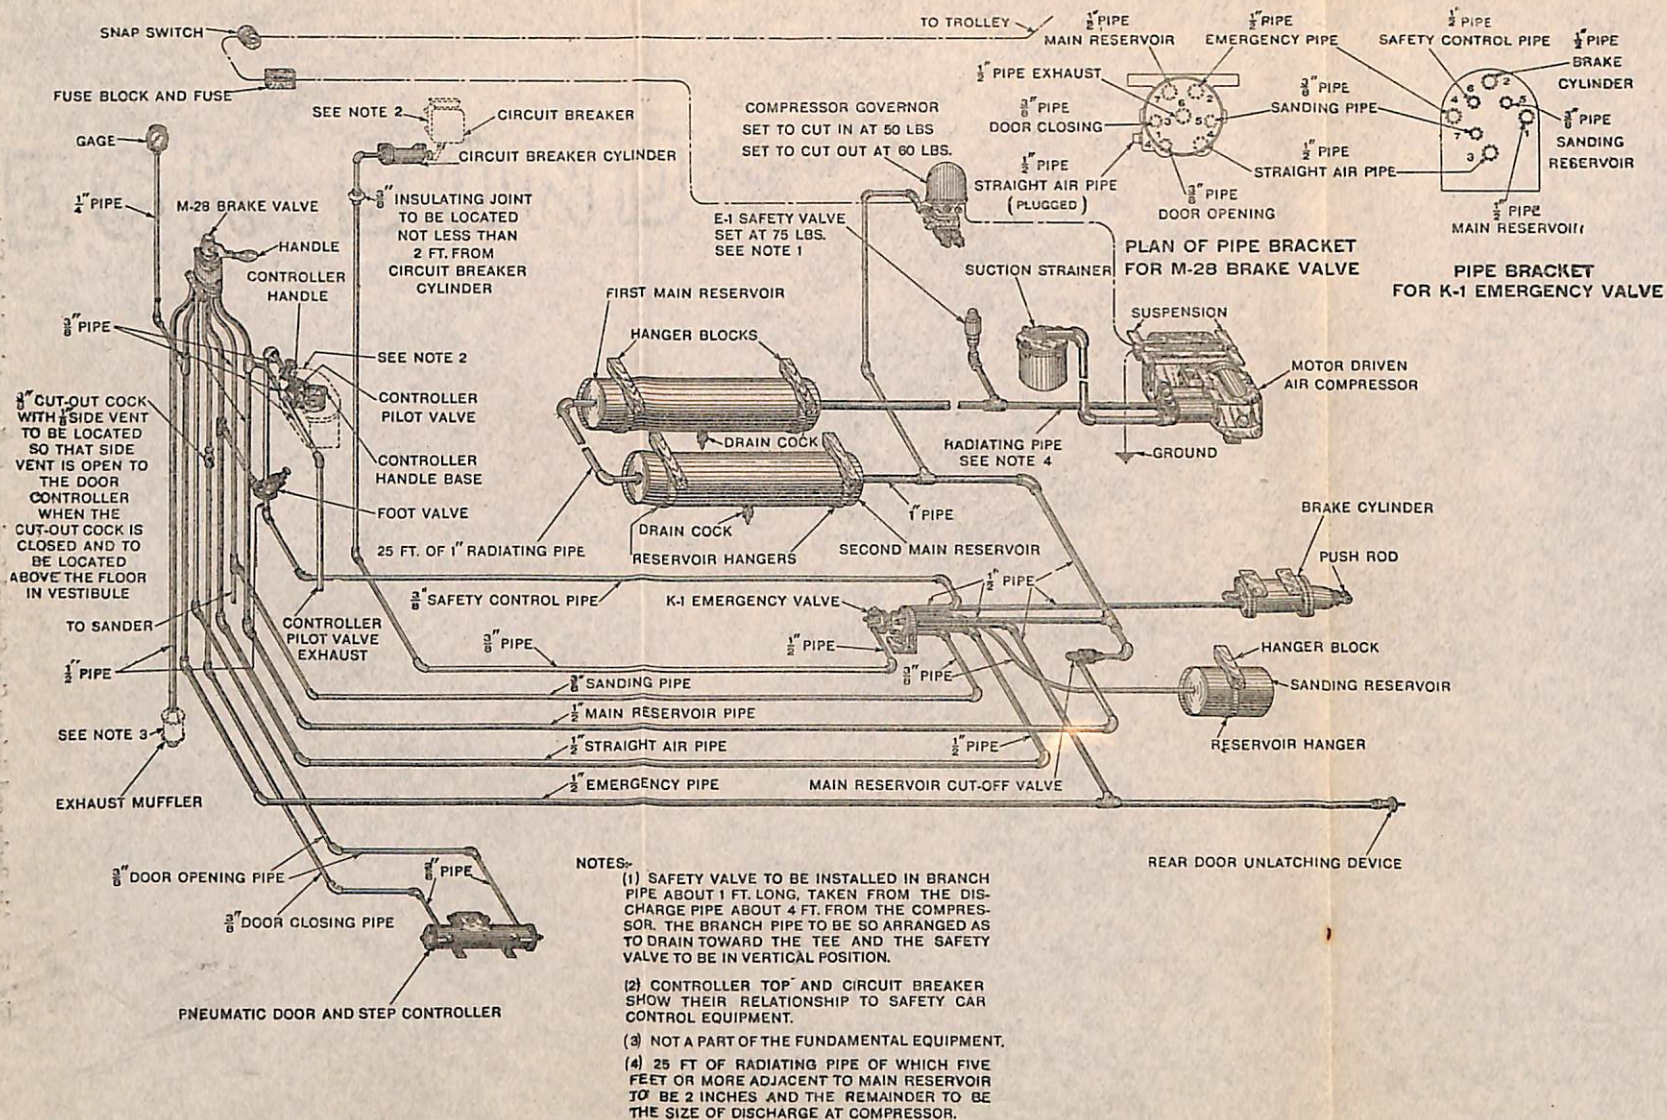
Air Brake and Safety Car Control Equipment. Isometric Piping Diagram. Single End
